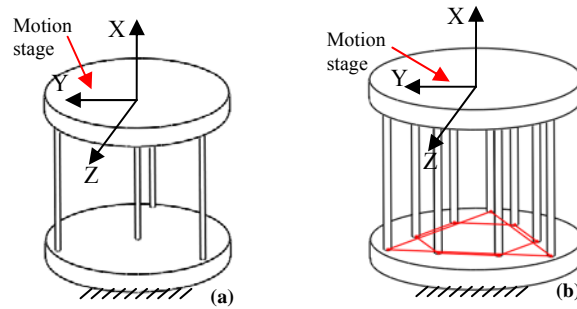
Other types of parallel double multi-beam modules: (a) composite four-beam module with three beams distributed around a regular triangle and one beam connecting to the center; (b) composite nine-beam module with the layouts that three outer beams distributed around a regular triangle and the six inner beams distributed around a regular hexagon
